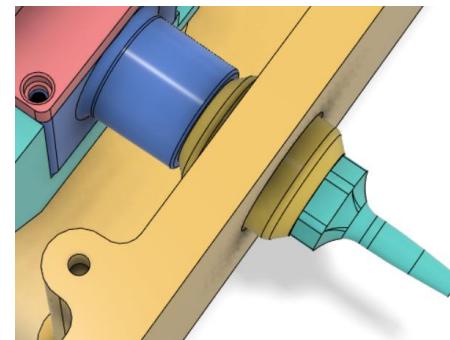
After press-fitting the Oxy Nozzle Body with the Oxy Nozzle Holder
